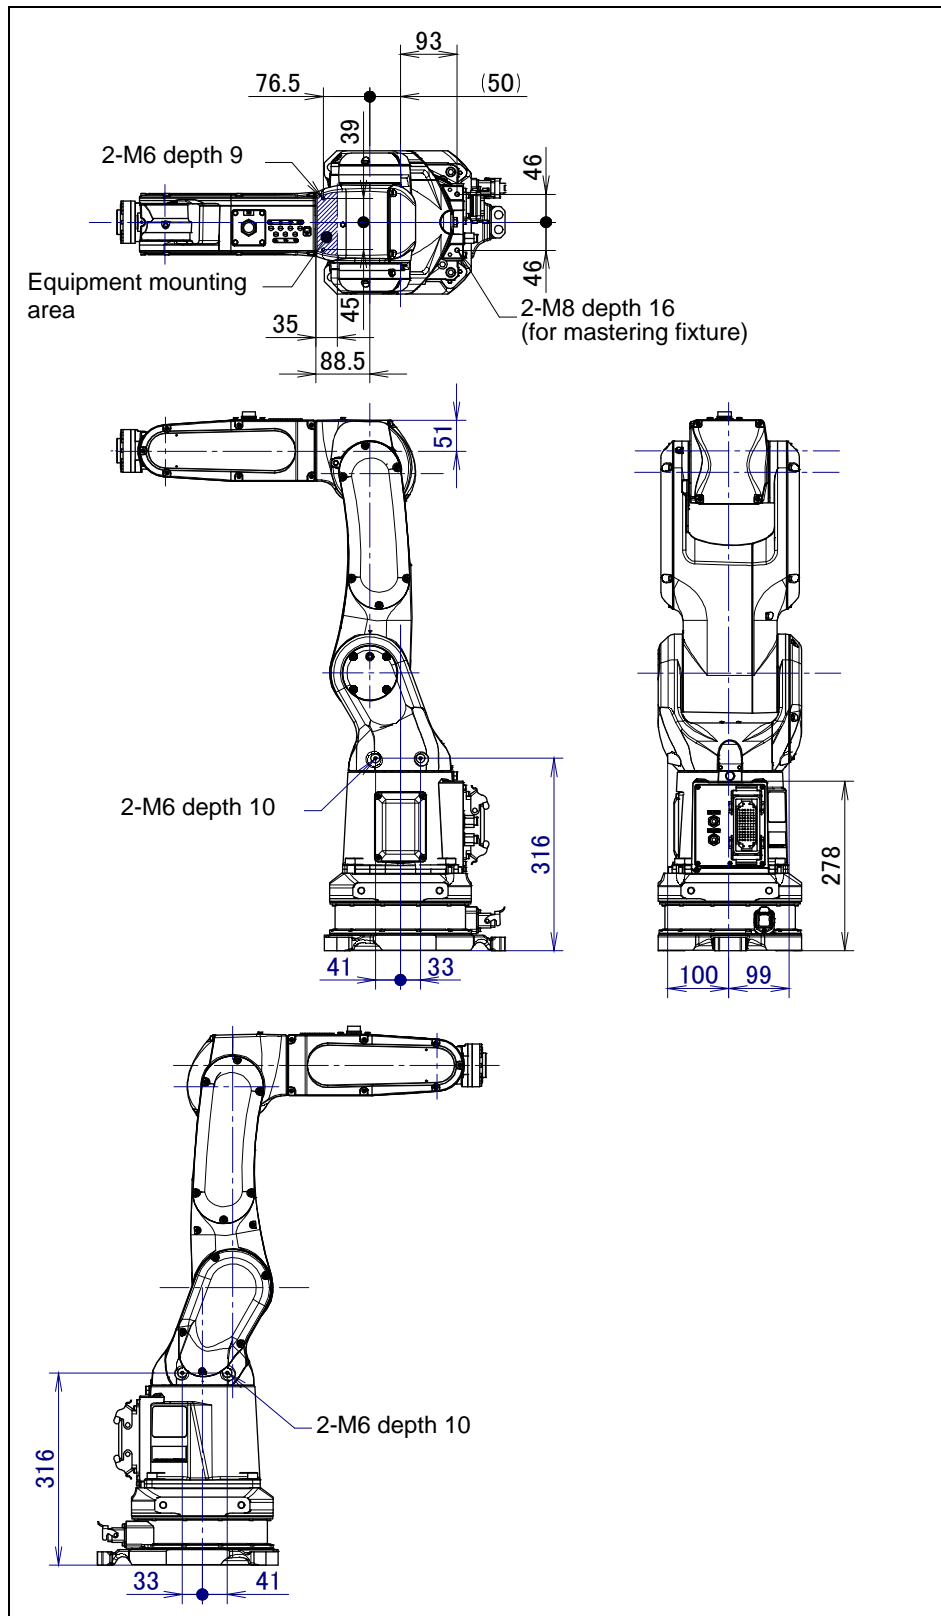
(b) Equipment mounting faces (CR-7iA, CR-7iA/L, CR-14iA/L)
